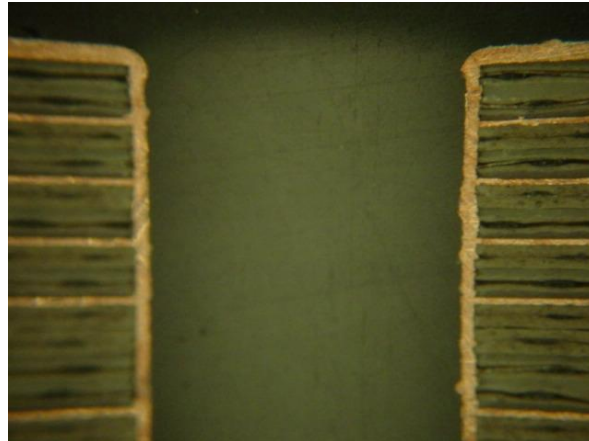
Multilayer board made with TSM-30 and TacPreg TPG-32
